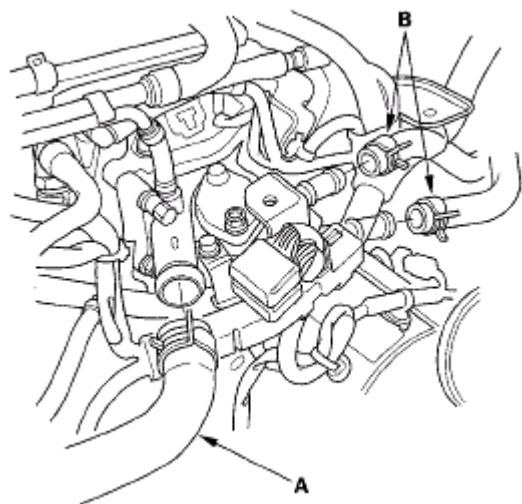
Identifying Upper Radiator Hose And Heater Hoses
